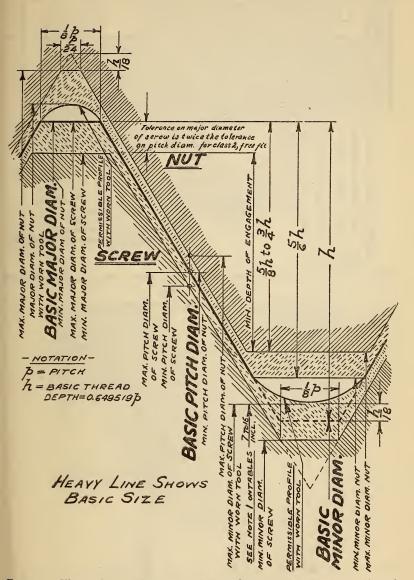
Illustration of tolerances and crest clearances for class 3, medium fit
